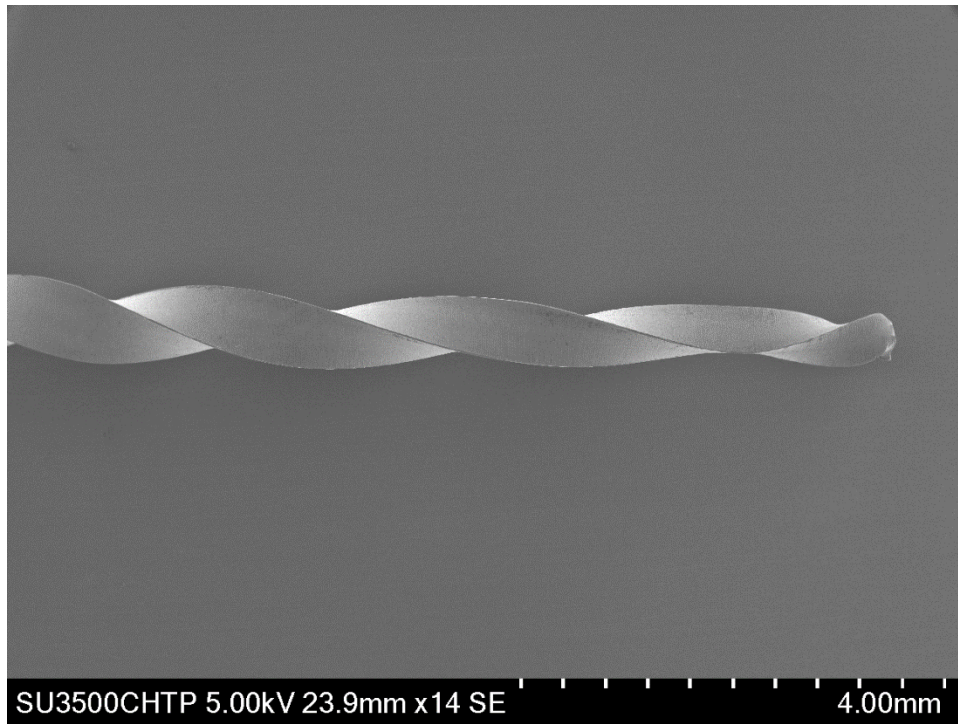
Unwinding of a HyFlex CM file after pure torsional fracture.
